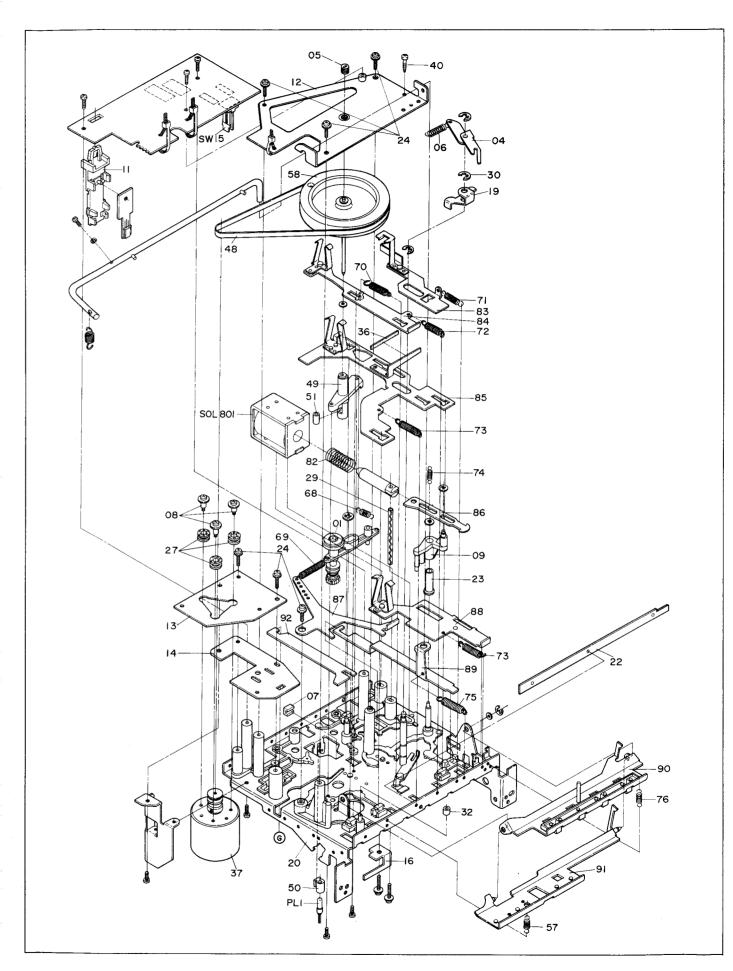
MECHANISM EXPLODED BOTTOM VIEW
